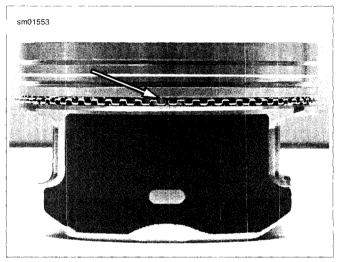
Installing Oil Control Ring Expander Spring (typical)
